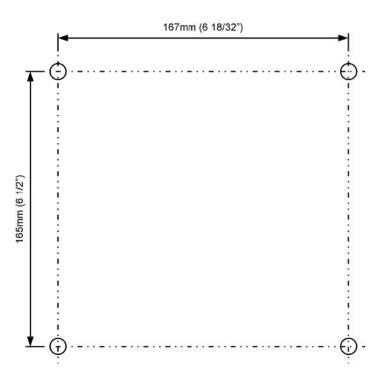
Fixing dimensions for mounting the AlarmLine II Analogue EN Composite Control Unit
